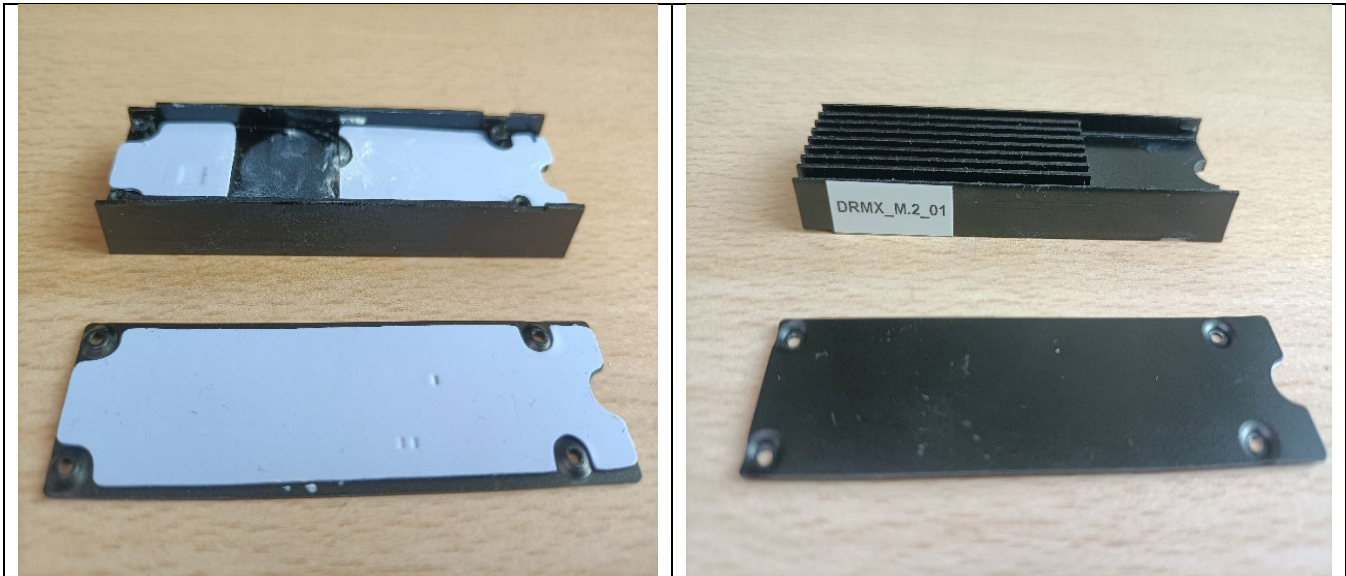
Photograph of Enclosure (heatsink)-Front & Rear view
